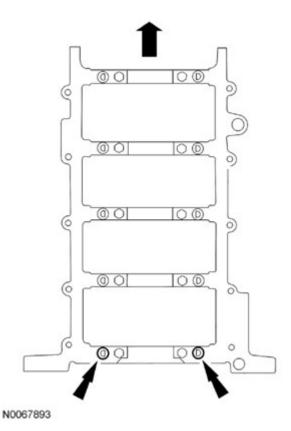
Installing Lower Crankshaft Thrust Washer Courtesy of FORD MOTOR CO.
